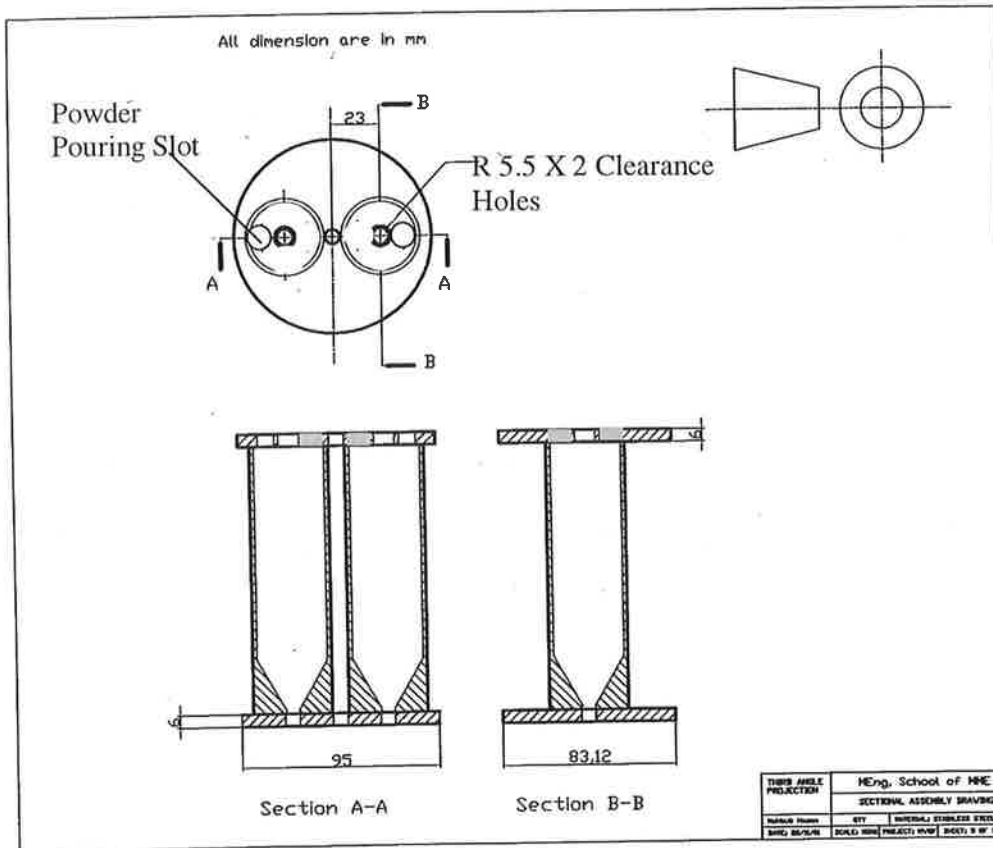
Sectional assembly drawing of the base plate, the top plate and the individual powder holders [49].
